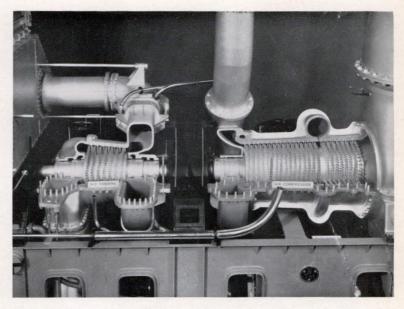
View of h.p. turbine and compressor in section taken from model shown in Fig. 2
